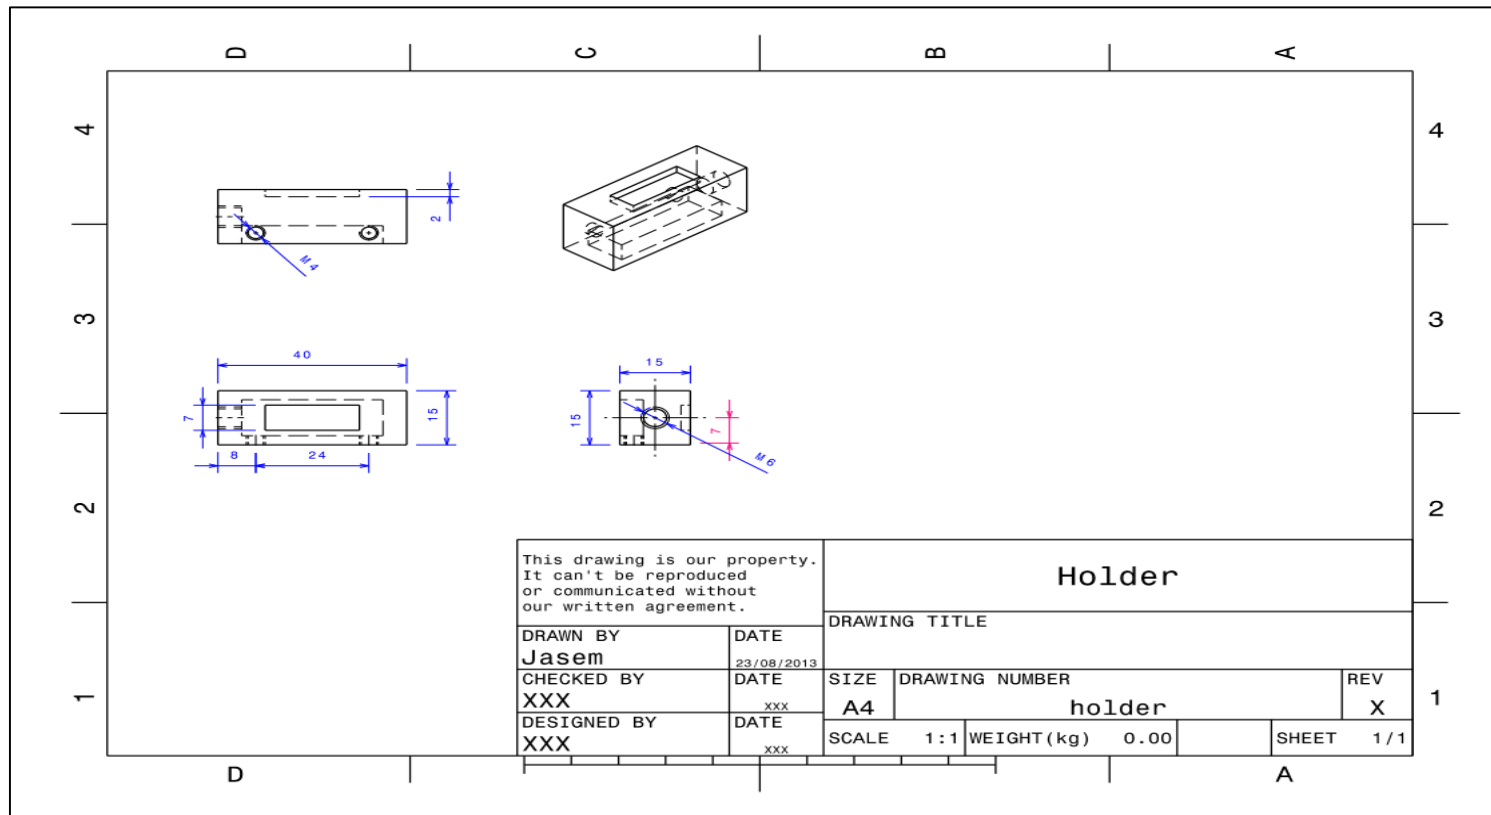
Two-dimensional views of the sample holder for the hybrid tribology machine with the ISO.
